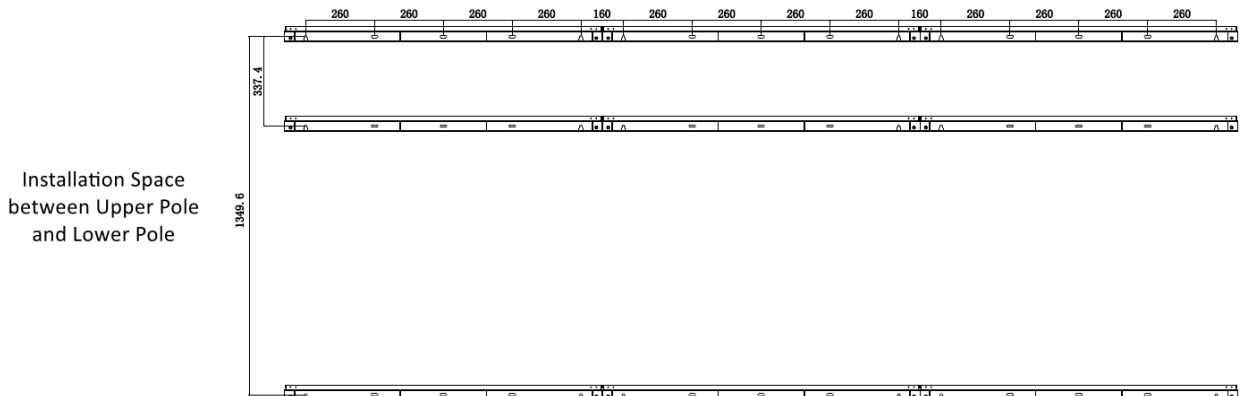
Wall-Mounted Bracket for 162-Inch Display
